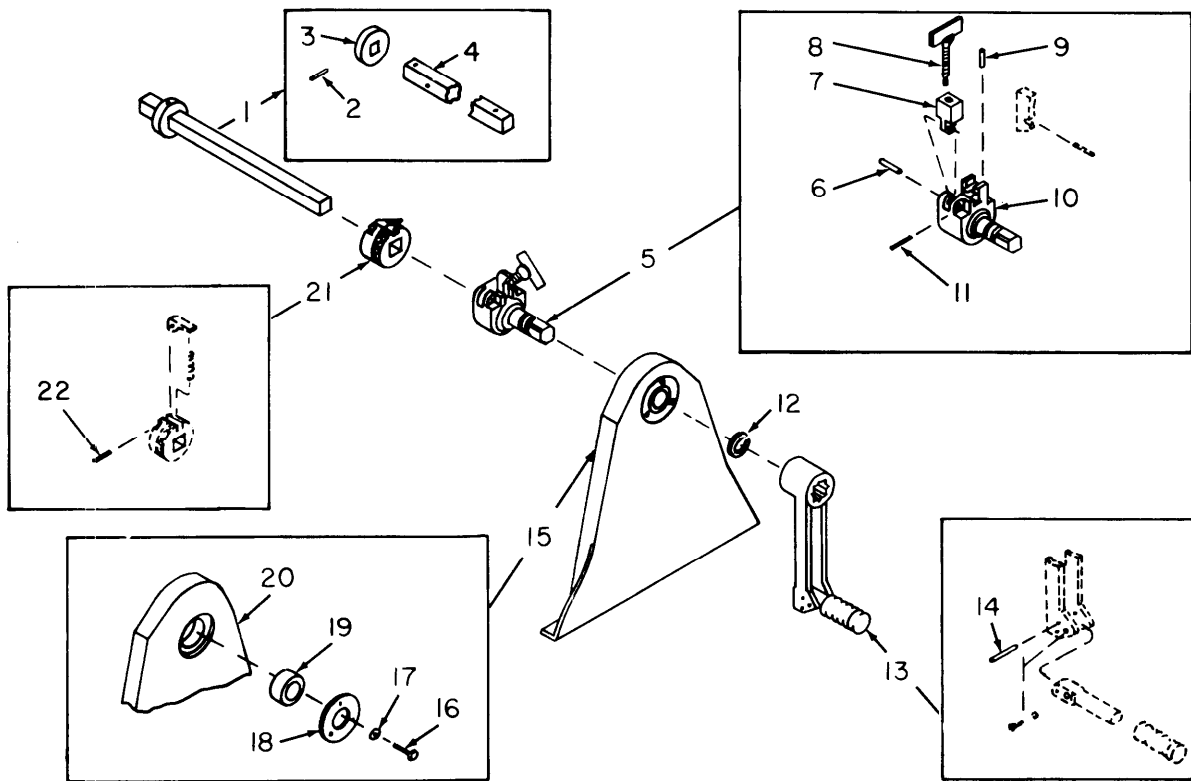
Reeling Machines, Cable, Motor Driven RL-172/G and RL-172A/G.
